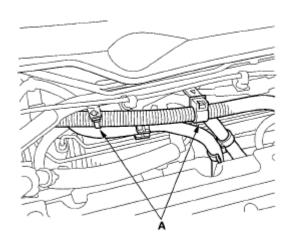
Removing P/S Heat Shield Courtesy of AMERICAN HONDA MOTOR CO., INC.
